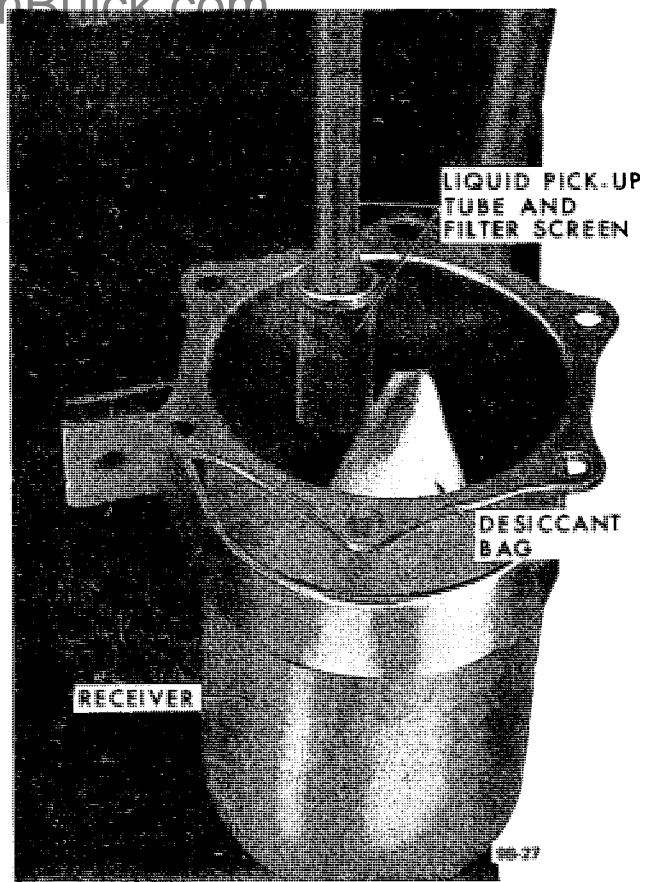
B-16 Receiver Shell Removed for Access to Desiccant Bag
